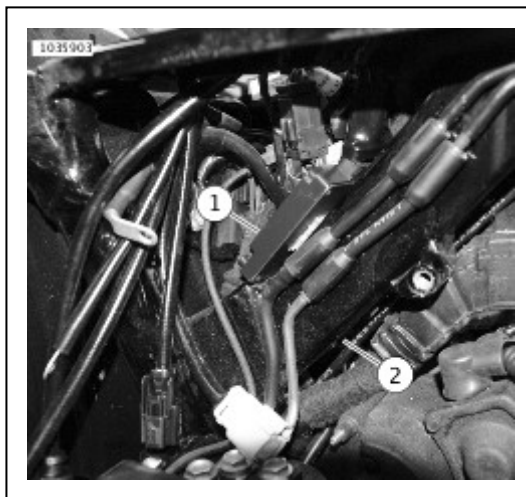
Oxygen Sensor Locations (Inboard Side of Exhaust Pipes)
